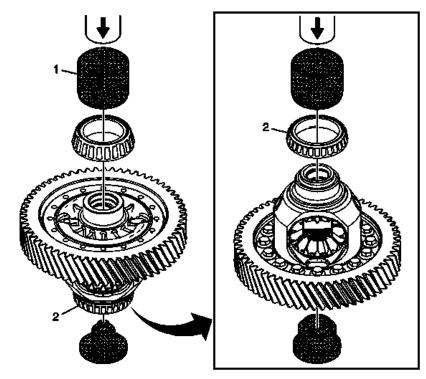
Identifying Front Differential Carrier Bearing Courtesy of GENERAL MOTORS COMPANY
